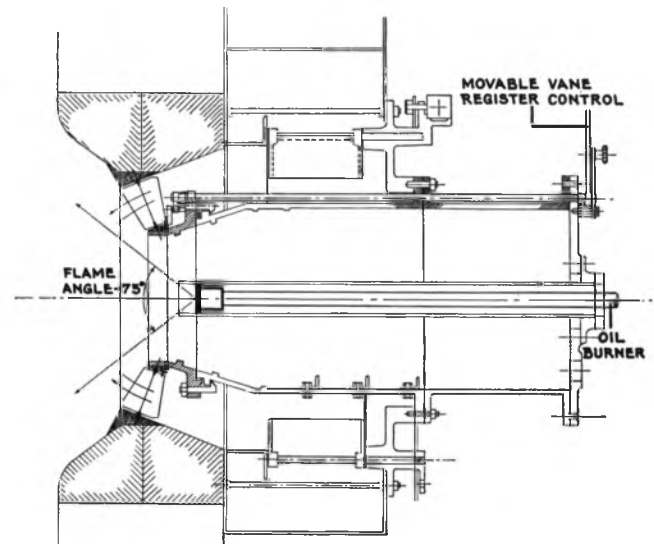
MOVABLE-VANE AIR REGISTER FITTED TO ORIGINAL BURNER ASSEMBLY
